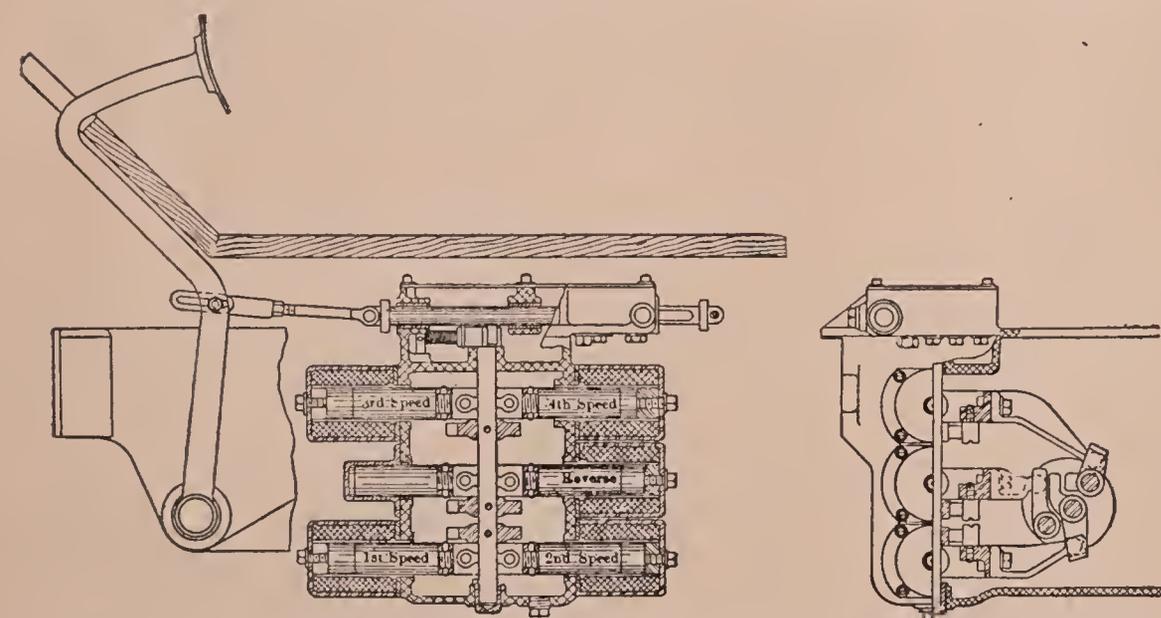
The Vulcan Electric Gear-Shifting Device, Showing the Solenoids and Plungers Which Move the Gears When the Current Is Applied.
